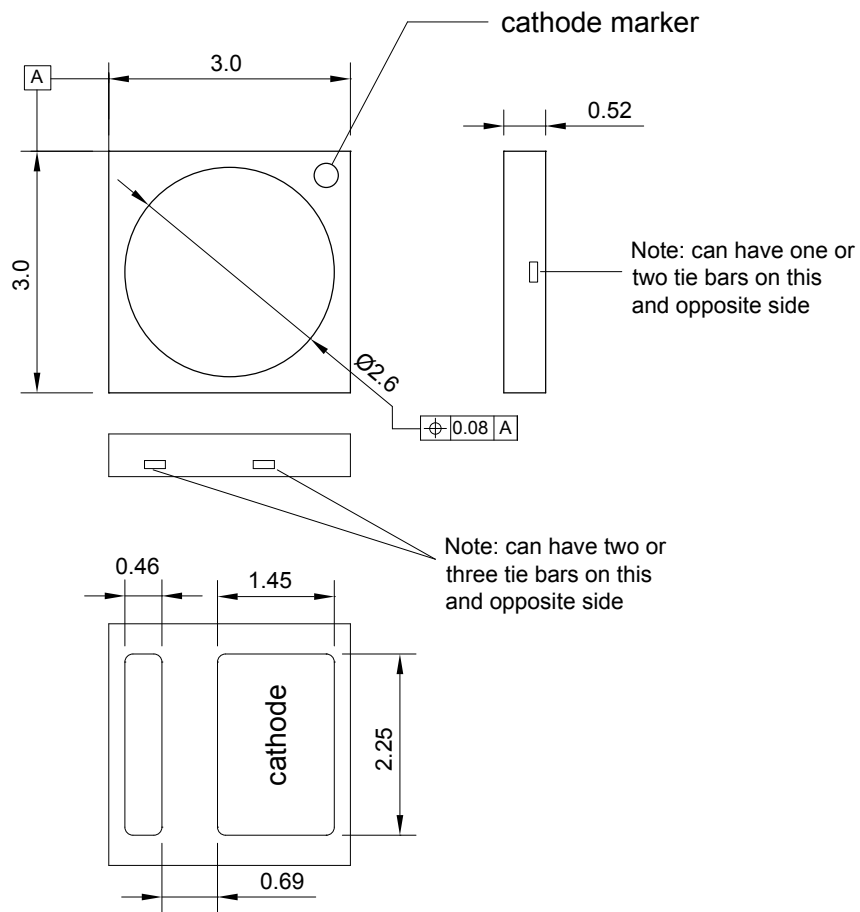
Mechanical dimensions for LUXEON 3030 HV.
